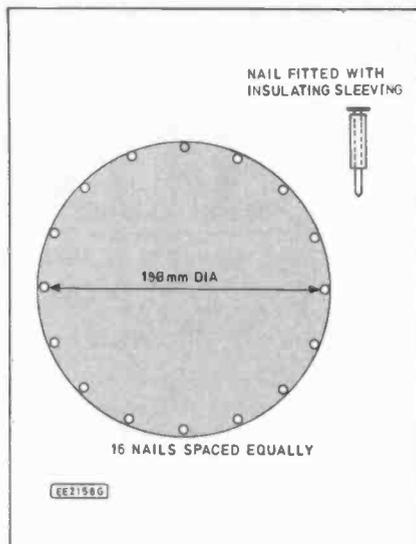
Making up a search coil template from a piece of wood with insulated panel pins nailed around the circumference.
